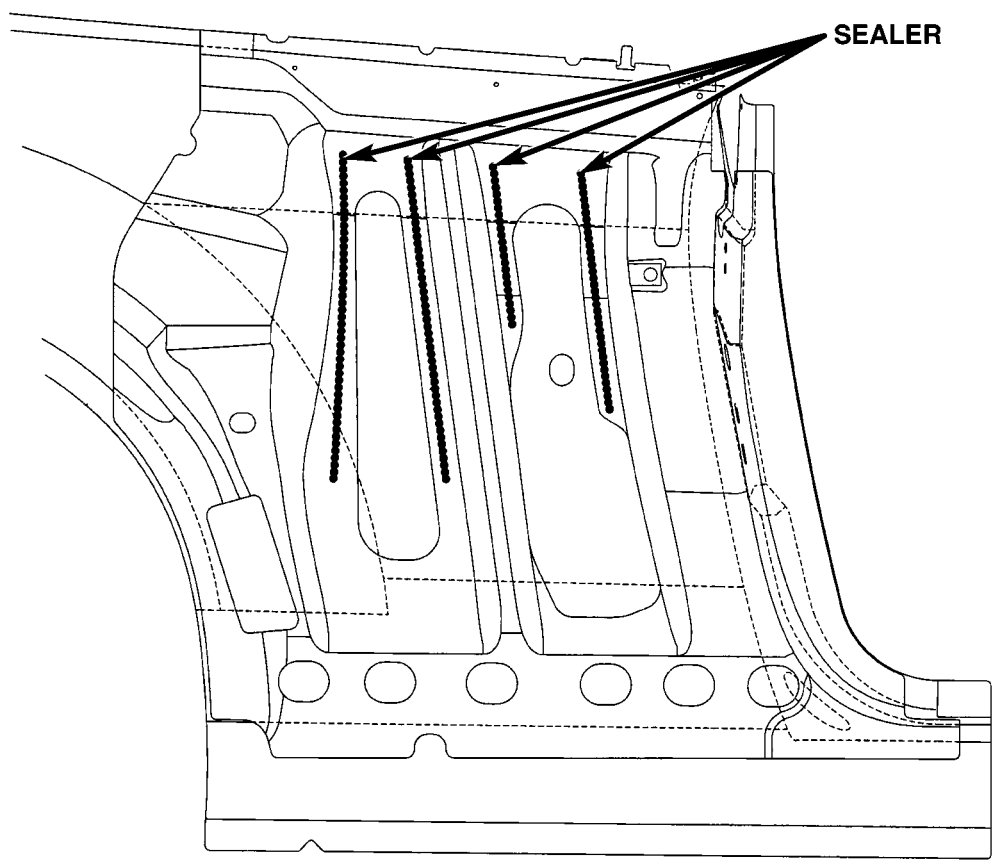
OUTER QUARTER PANEL & SHELF ASSEMBLY
